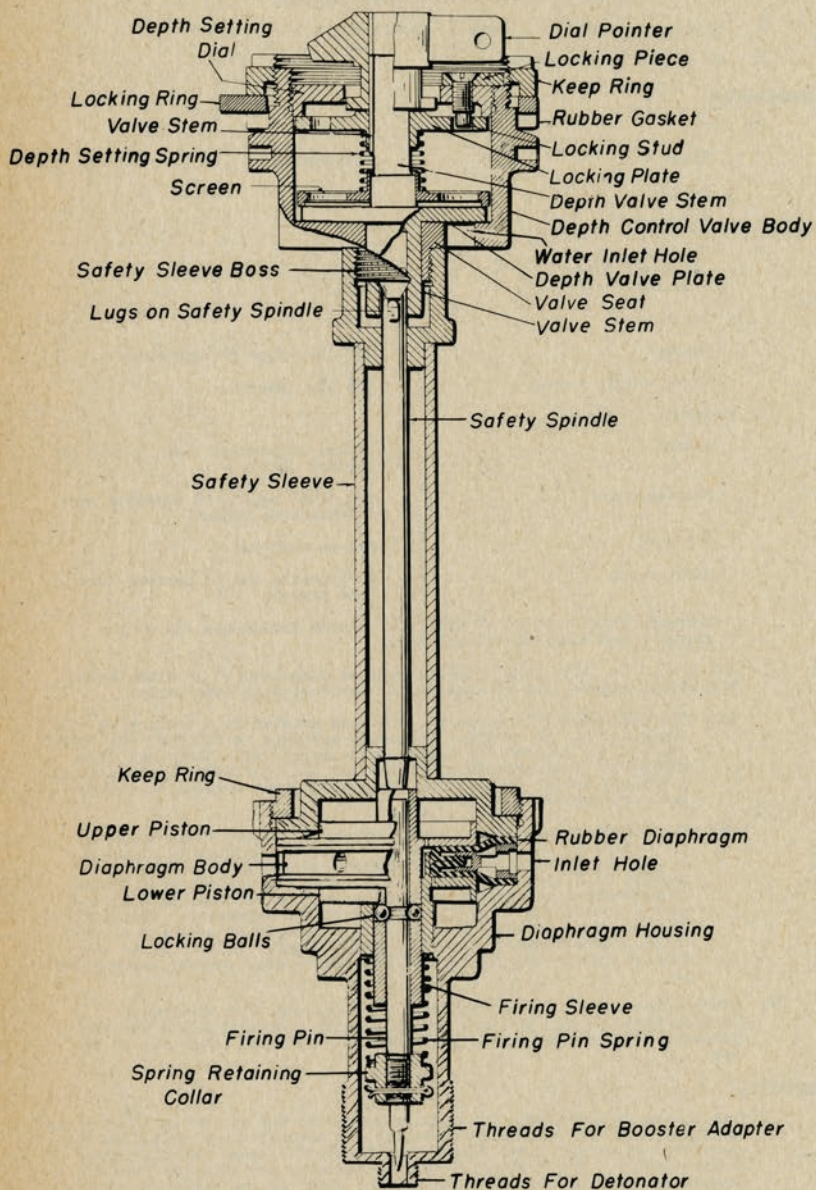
Type 2, Modification 1 Depth Charge Pistol, Sectional View
